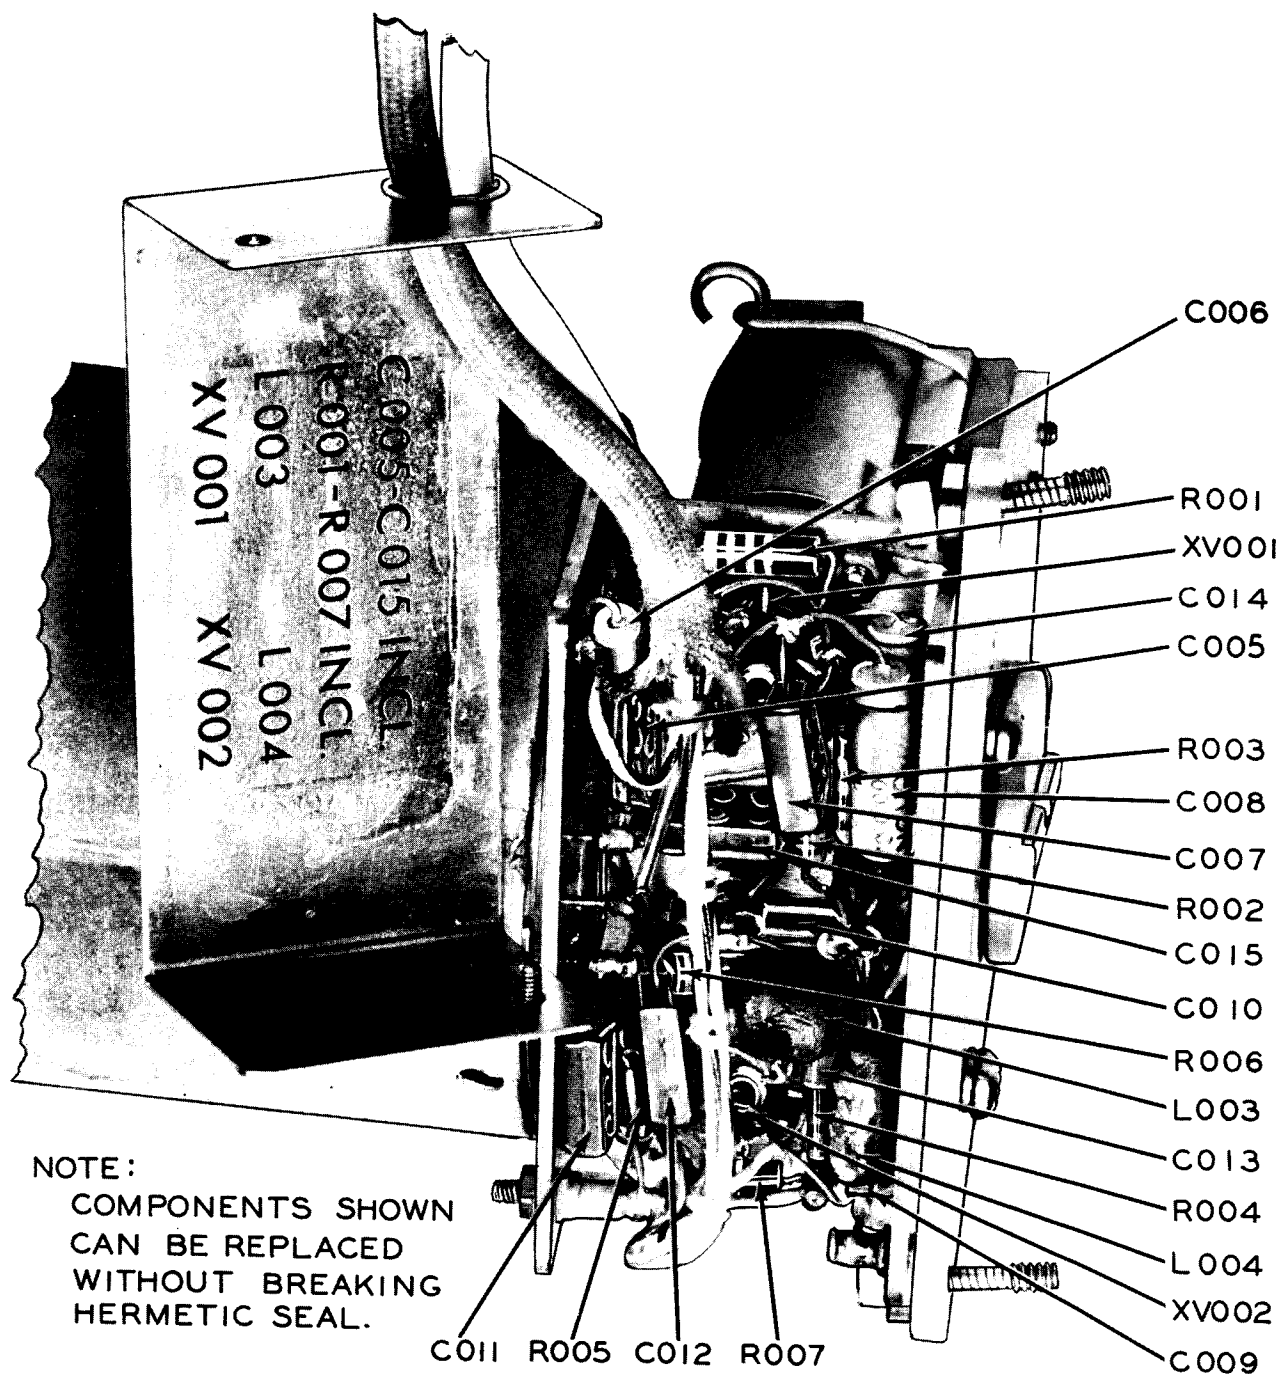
Master oscillator (type 70H-4), replaceable parts.
